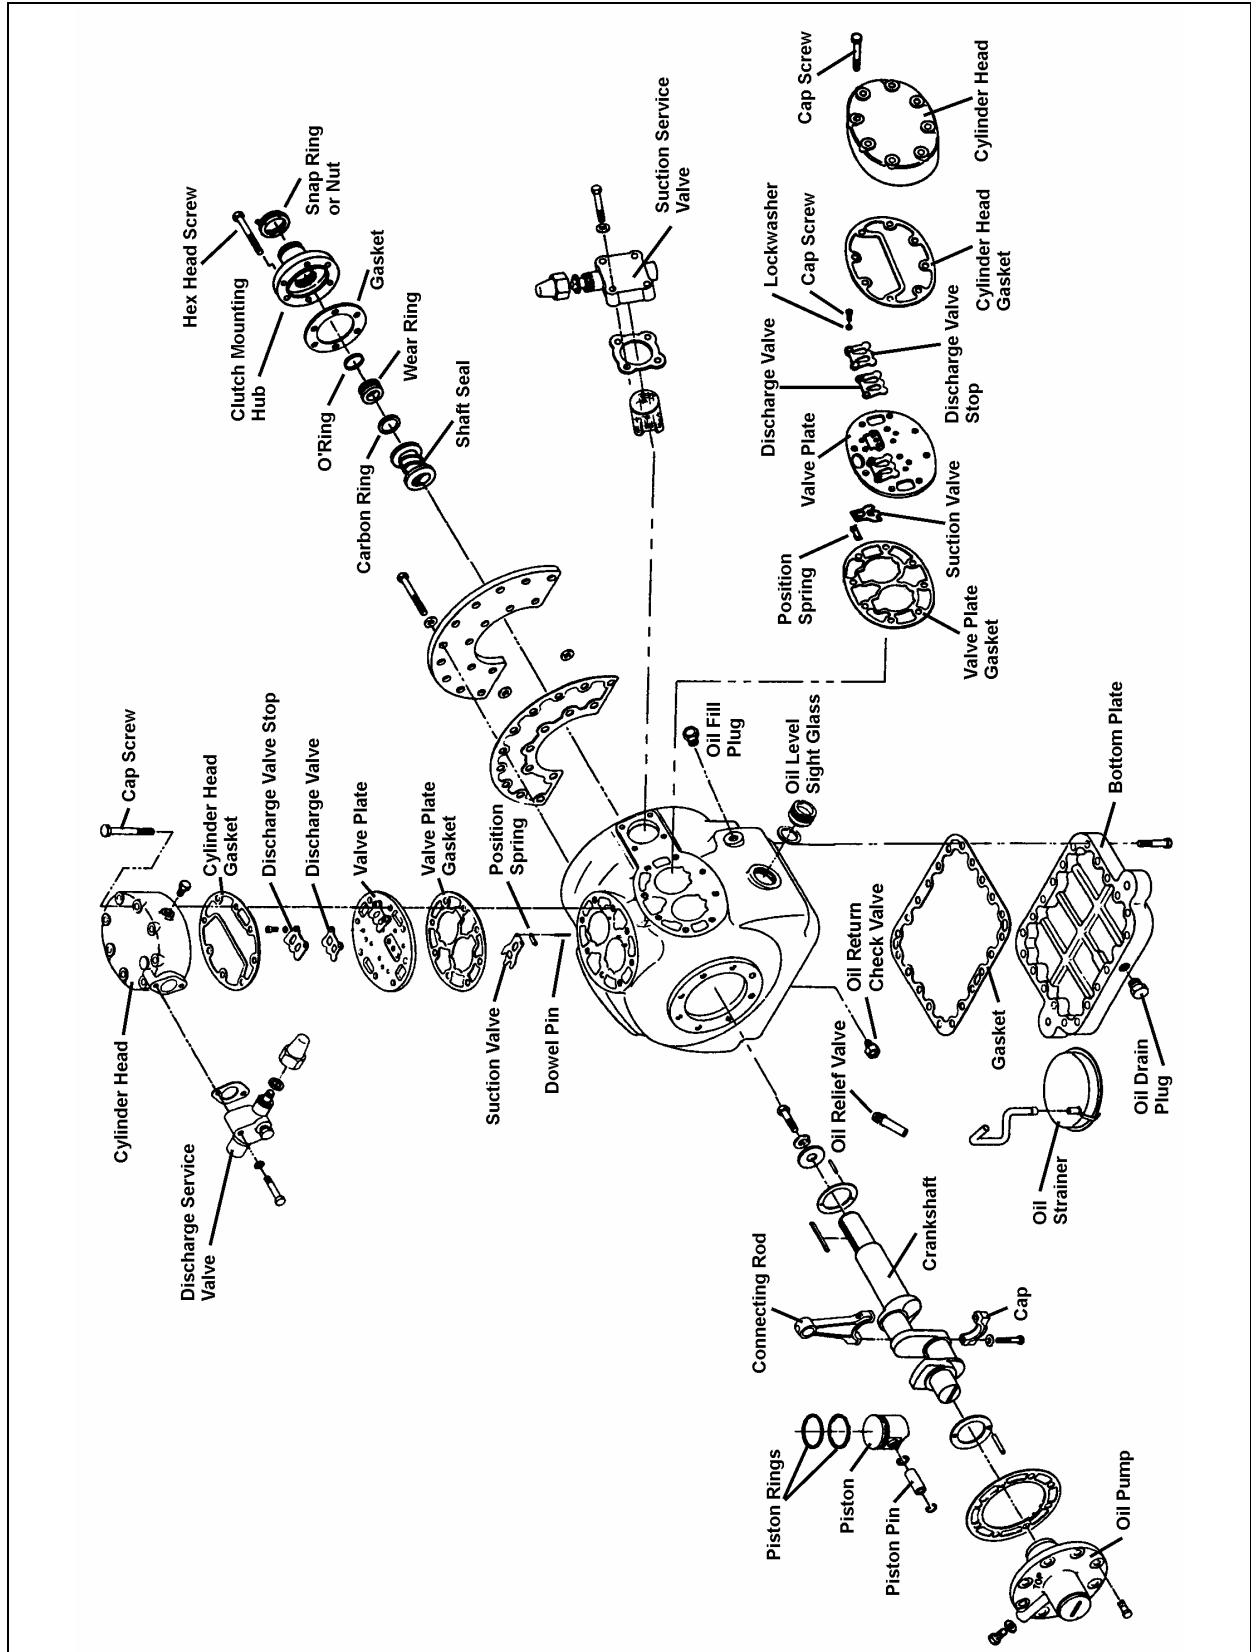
EXPLODED VIEW OF 05G COMPRESSOR
